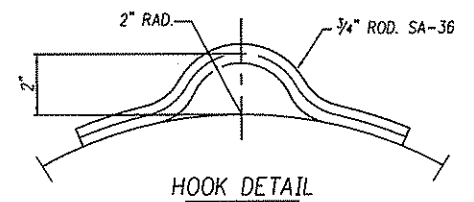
" I.D. 300# MANHOLE DAVIT
